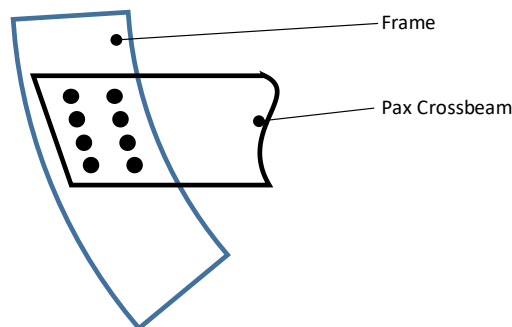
Typical passenger aircraft Frame to Pax. Crossbeam Bolted Joint
